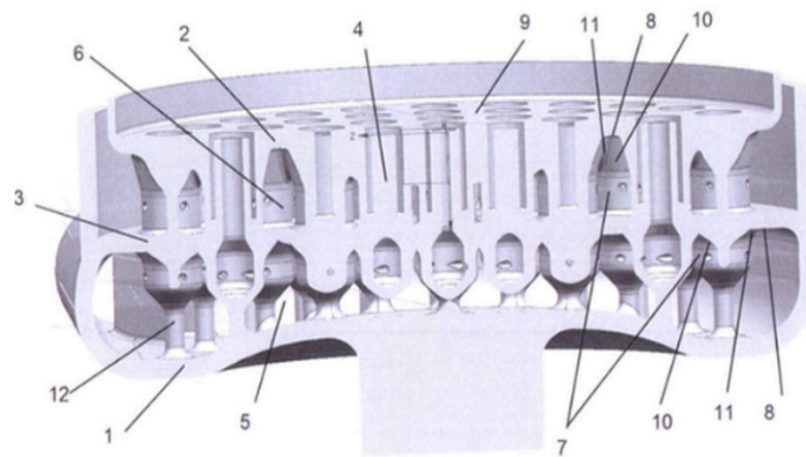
A mixing head developed by additive manufacturing. (1)-Injector body; (2)-Fire bottom; (3)-Intermediate bottom; (4)-Fuel nozzles; (5)-Cavity; (6)-Cavity; (7)-External surfaces cavity; (8)-External surfaces; (9)-Surface of the fire wall; (10)-Conical surfaces; (11)-Curved surfaces; (12)-Conduit section of injector. Reproduced from RU Patent No. 2826040C2 in Ref. [208].
